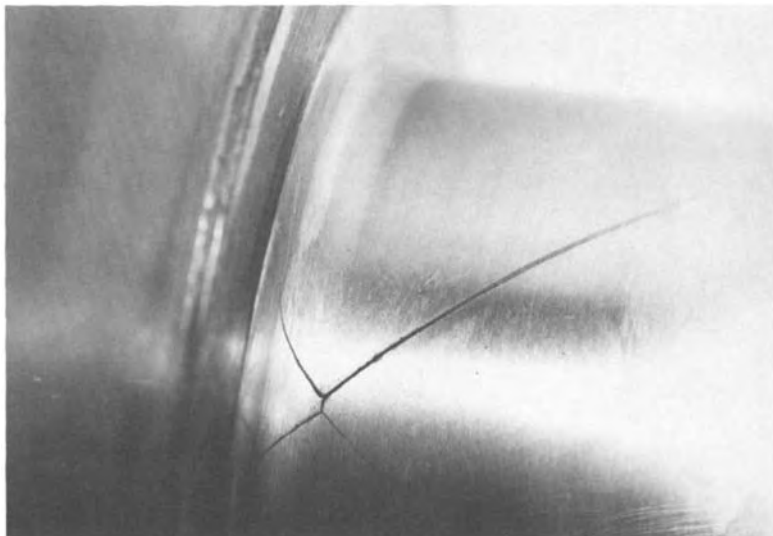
Characteristic X-shaped crack pattern in a 1045 steel crankshaft after testing in reversed torsional fatigue in a special machine, not in an engine. In this case, the original crack was in the transverse shear plane, not in the longitudinal shear plane as in Fig. 28.
